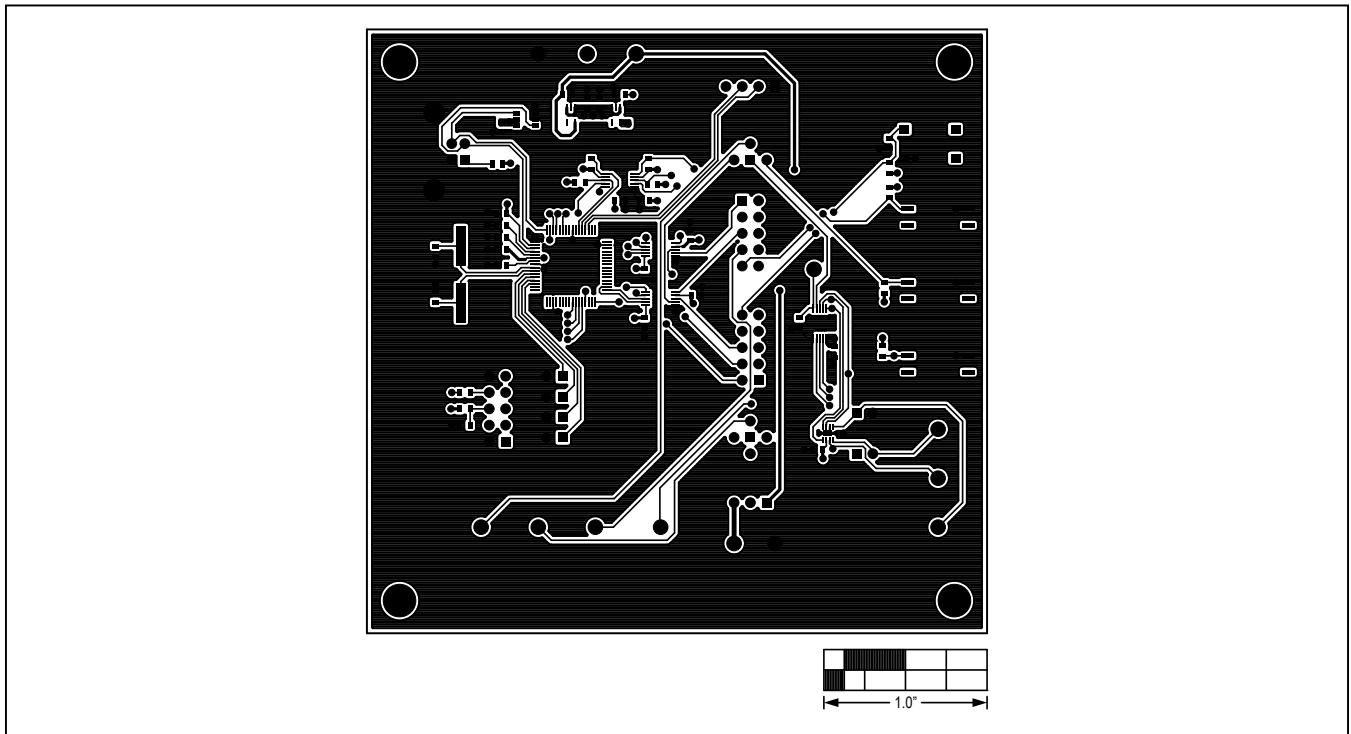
MAX5395L EV Kit PCB Layout—Component Side
